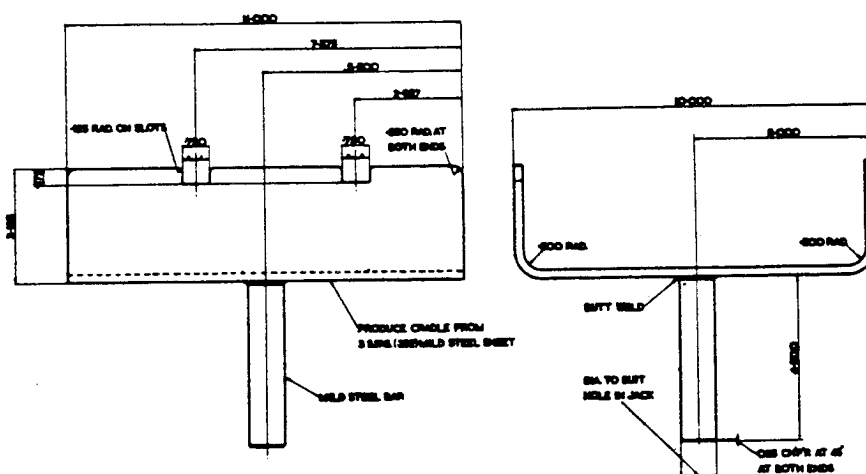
SUPPORT TRAY - DIMENSIONS.
